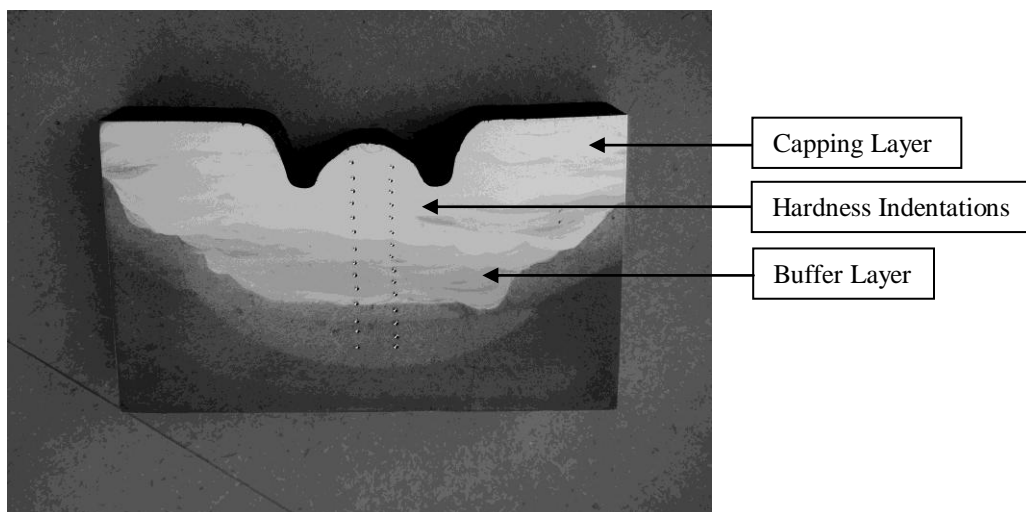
Cross section of connecting rod die, showing buffer and capping layers and Rockwell Hardness profile on a section taken from a die that has produced 20000 forgings.
